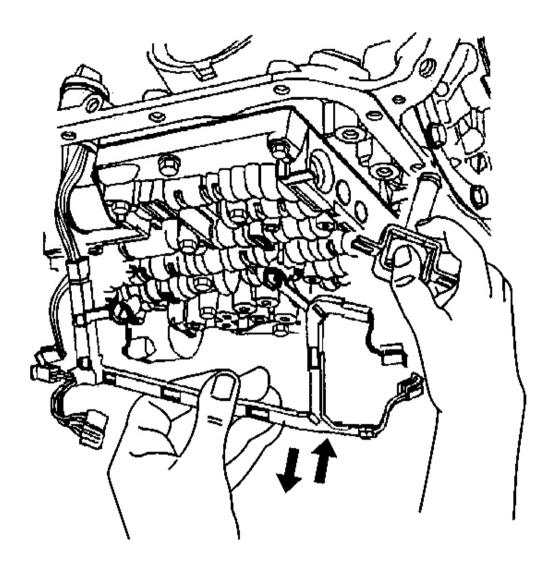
Identifying TCC Solenoid (With O-Ring Seal) And Wiring Harness Courtesy of GENERAL MOTORS CORP.
